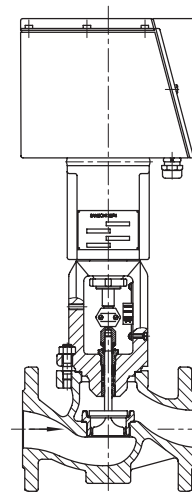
· Type 3241/3274 Electric Control Valve with Type 3274 Electric Actuator and Type 3241 Globe Valve
